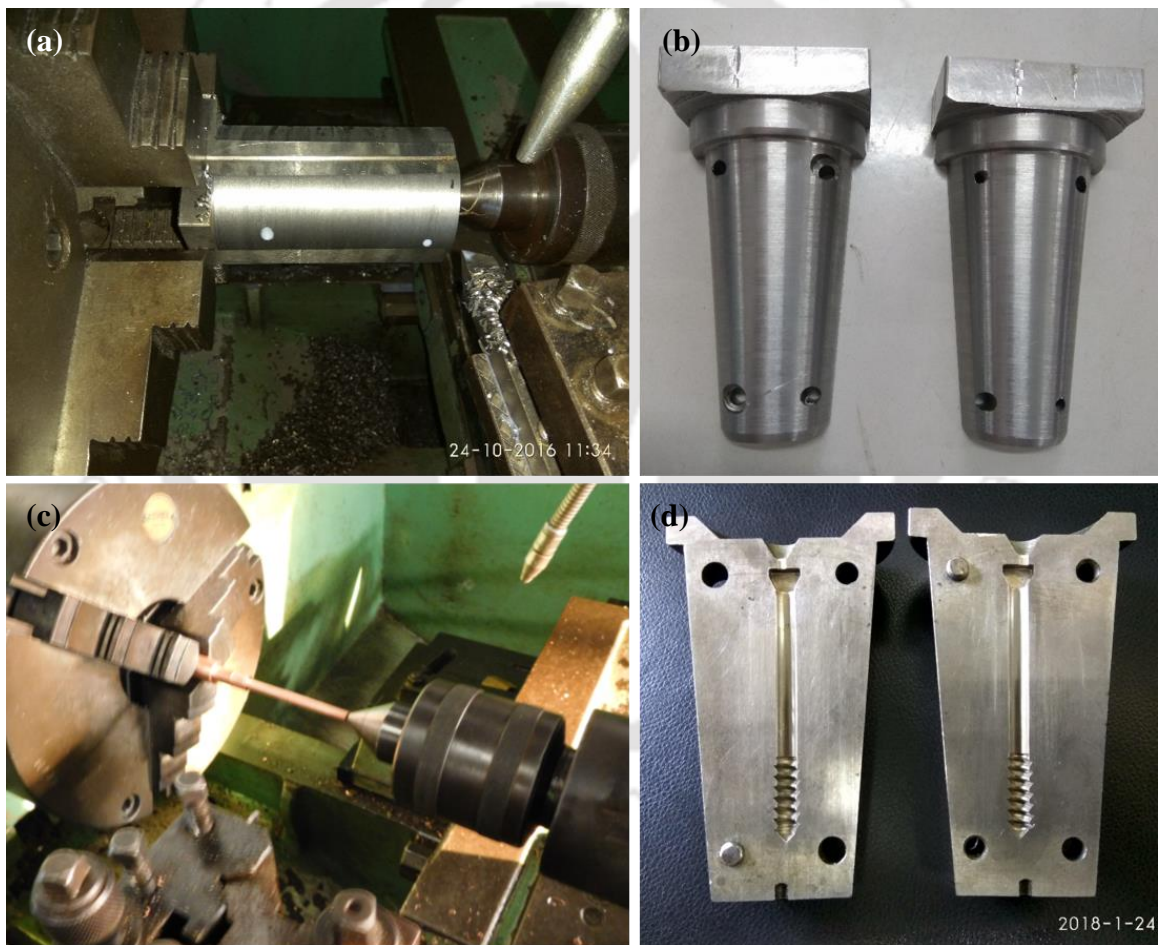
Schematic diagrams for fabrication of cancellous screw molds (a) Machining of mold (b) Mold in prefinal shape (c) fabrication of copper electrode (d) Mold in final shape after machining.
